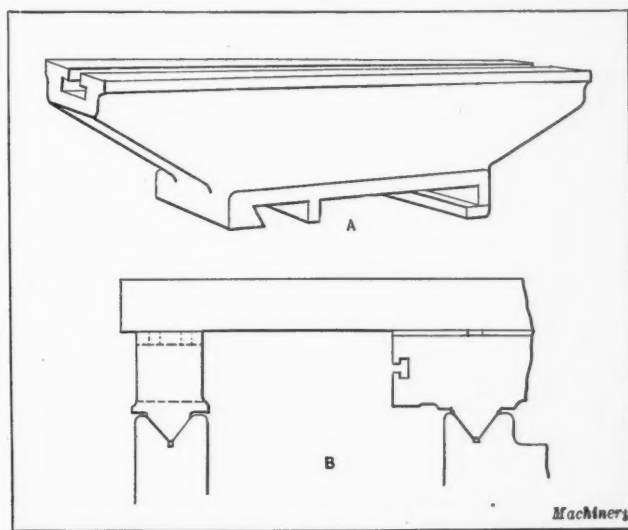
(A) Casting used on Boring Machine Tables to provide Supplementary Support; (B) Use of a Supplementary Plate mounted on a Vee in Front of the Table
